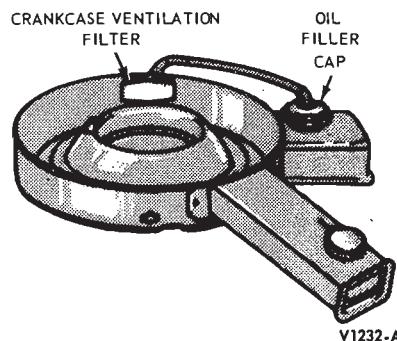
Crankcase Ventilation Filter—351 C Engines
